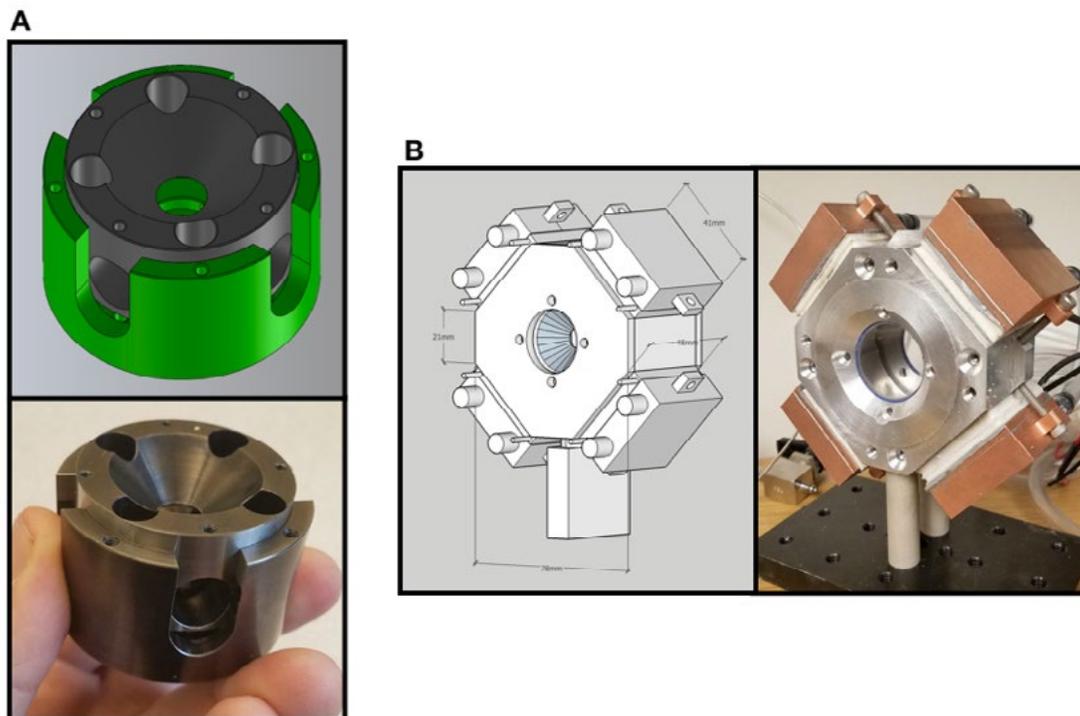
A) Computer generated technical drawing and photograph of the final diamond anvil cell after machining and heat treatment. B) Technical drawing and photograph of the cryostat apparatus, showing the large opening allowing important optical and X-ray access to the sample.
